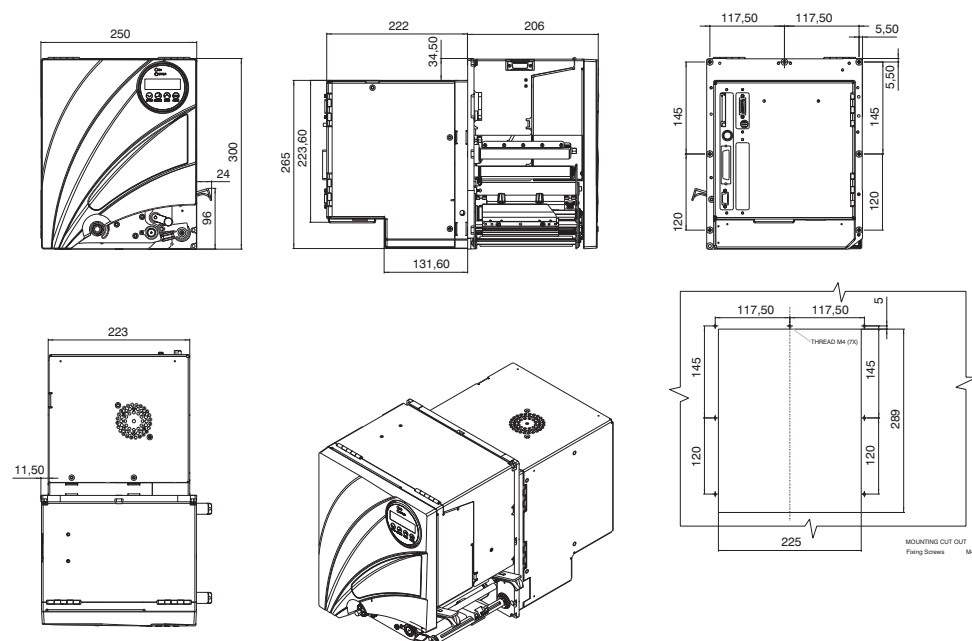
Measures of the DPM and of the required mounting cutout (right below).
